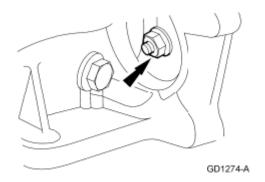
Locating Torque Converter-To-Flexplate Nuts Courtesy of FORD MOTOR CO.
